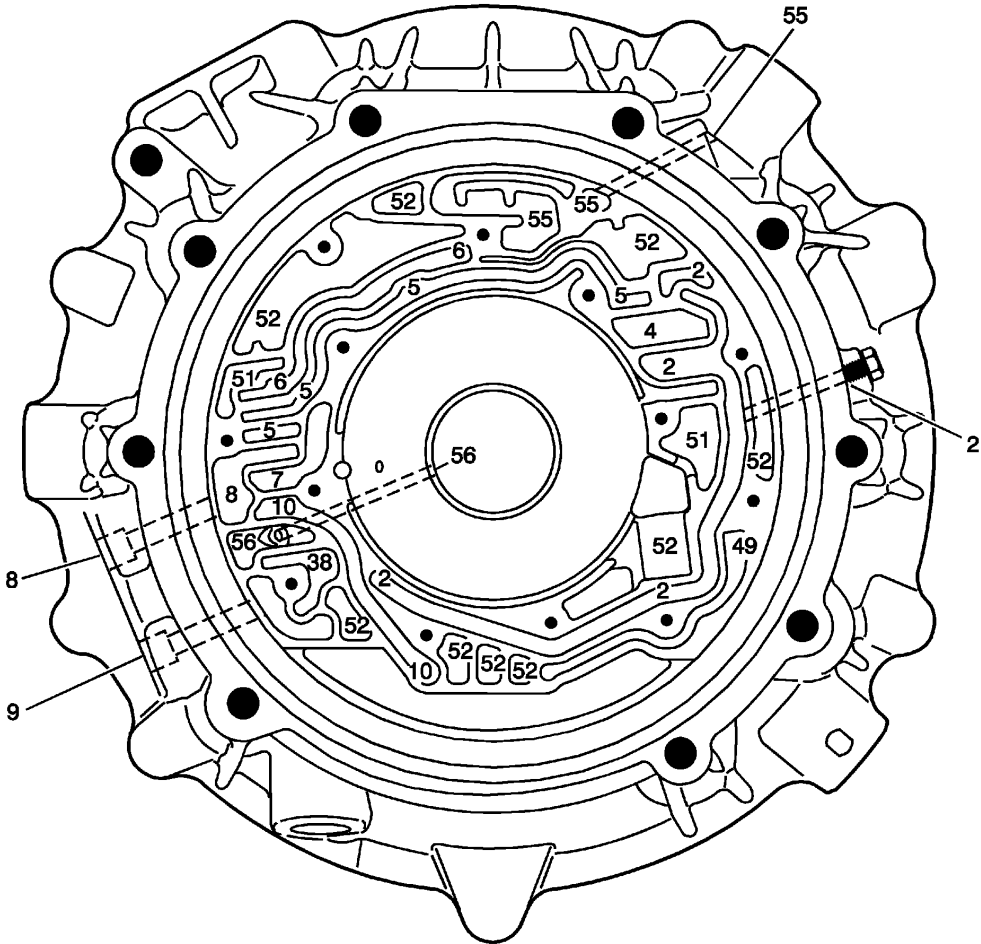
Case Fluid Passages (Control Valve Body Side)
